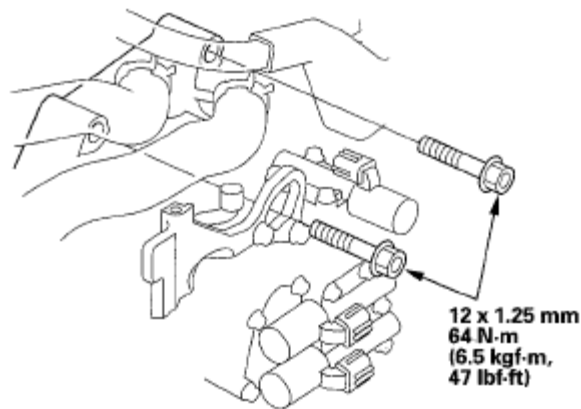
Identifying Top Transmission Housing Mounting Bolts
